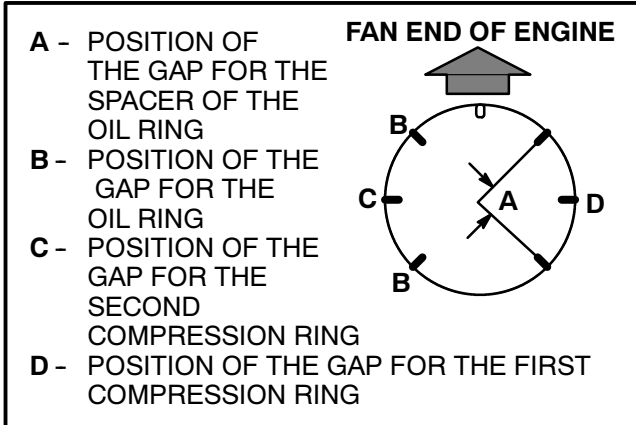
ARRANGEMENT OF THE PISTON RINGS ON THE PISTON
